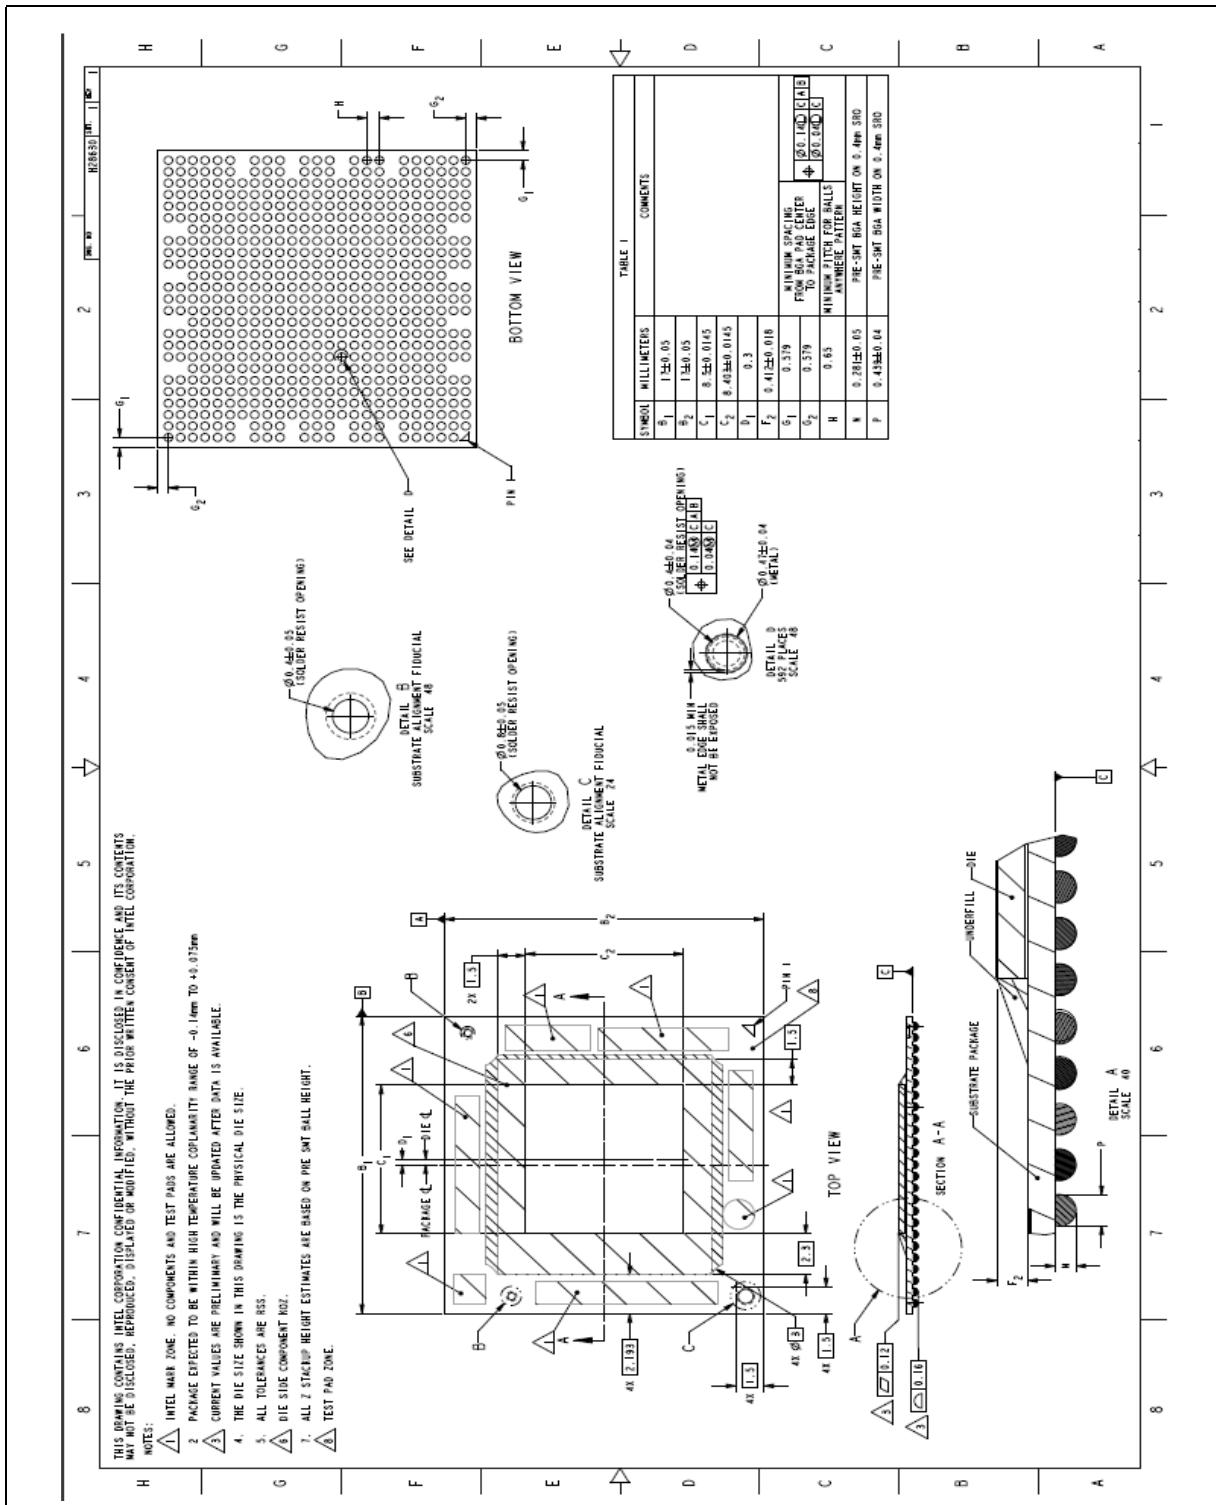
Package Mechanical Drawing for VMS-T3 (Part 2)
